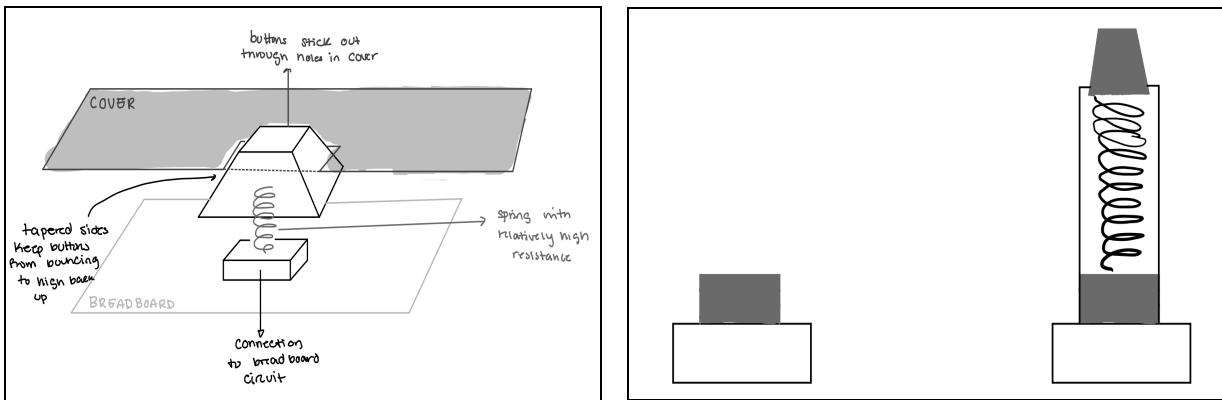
, Drawings of intended design for spring loaded button mechanism (Team 3, 2024)
